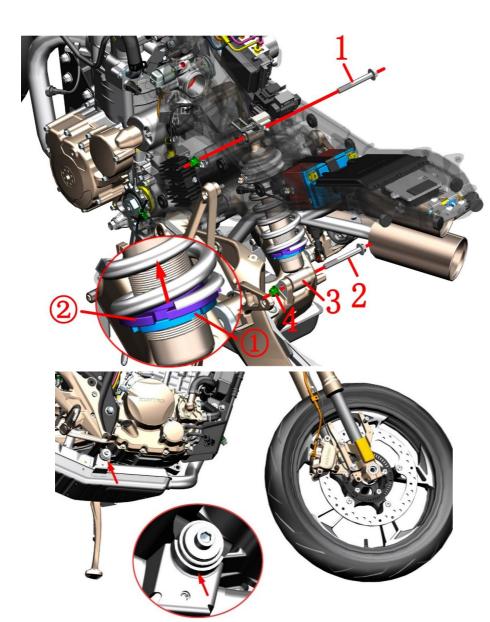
Rear wheel,		Rear shock absorber	CHK	(4)
